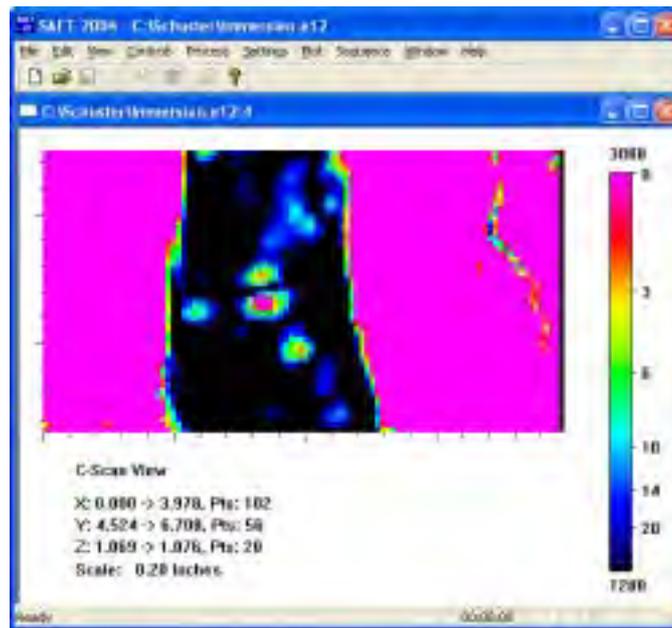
Side view SAFT-UT image using 5 MHz ultrasound from the inside surface of CRDM penetration alloy 600 tube.
